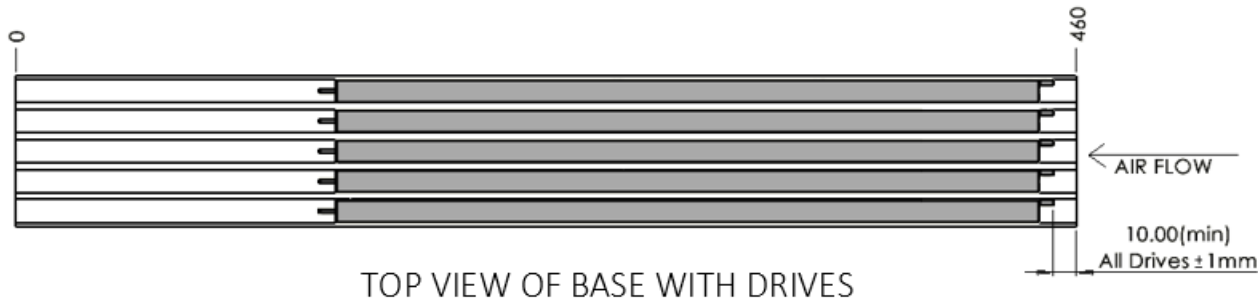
Required Dimensions of E1.S 25mm Test Fixture
